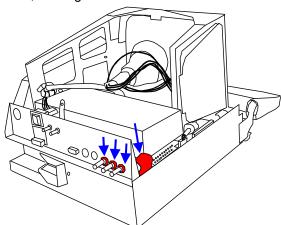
1-19. Nuts to be removed and connector to Motherboard
